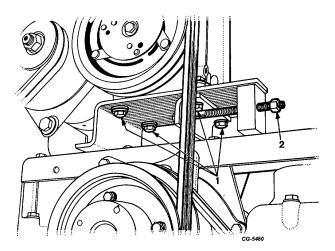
Freon Compressor Adjusting and Mounting Bolts Locations
